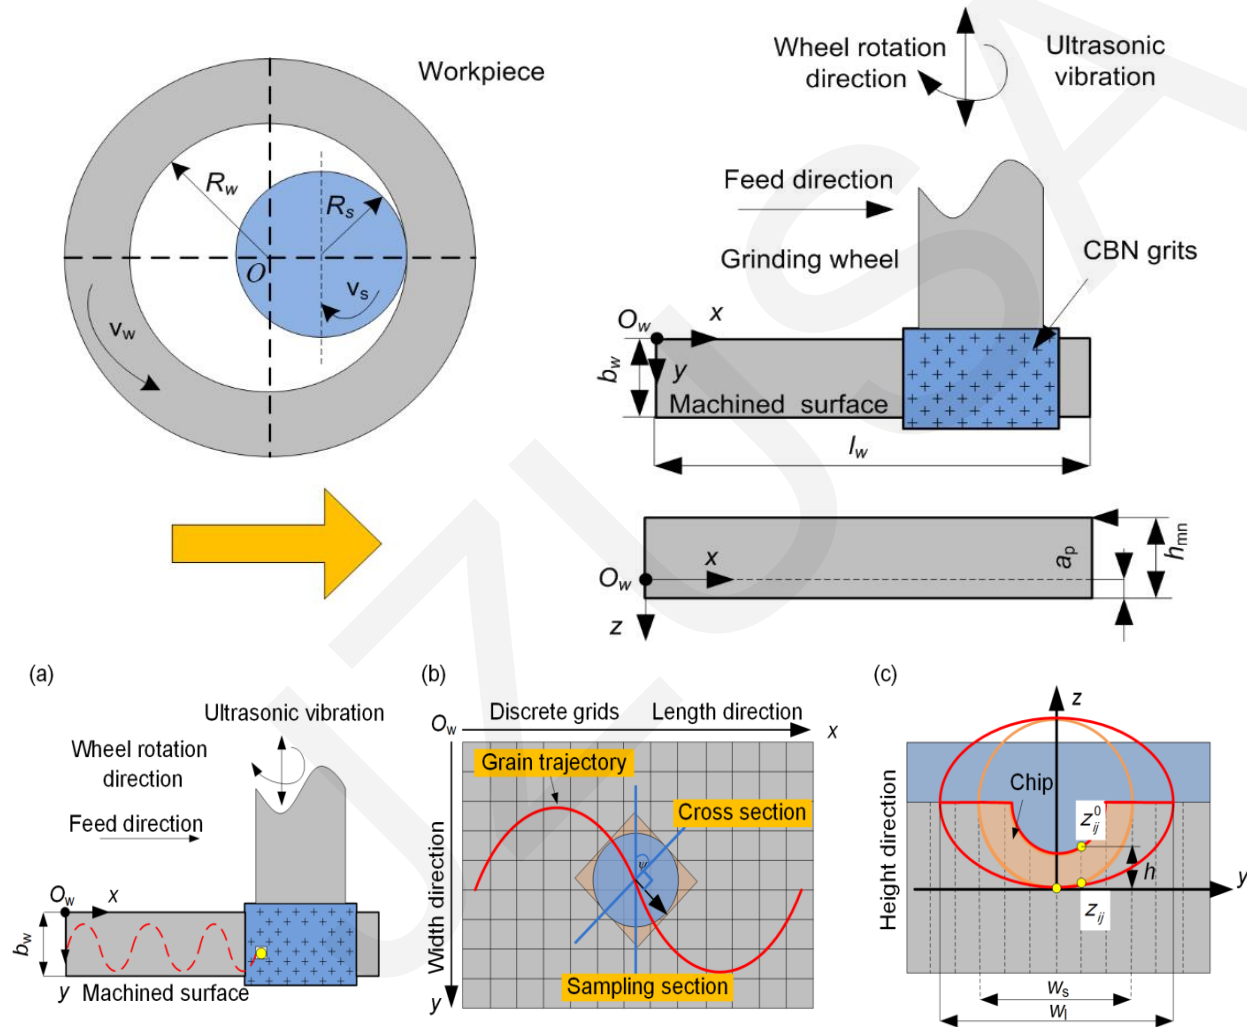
Chip generation mechanism illustration: (a) ultrasonic grinding diagram; (b) workpiece grids; (c) UCT and width
